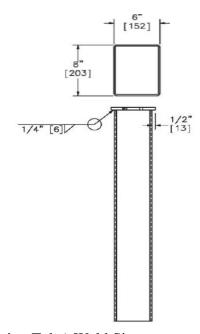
Lower Post (Foundation Tube) Weld Size
